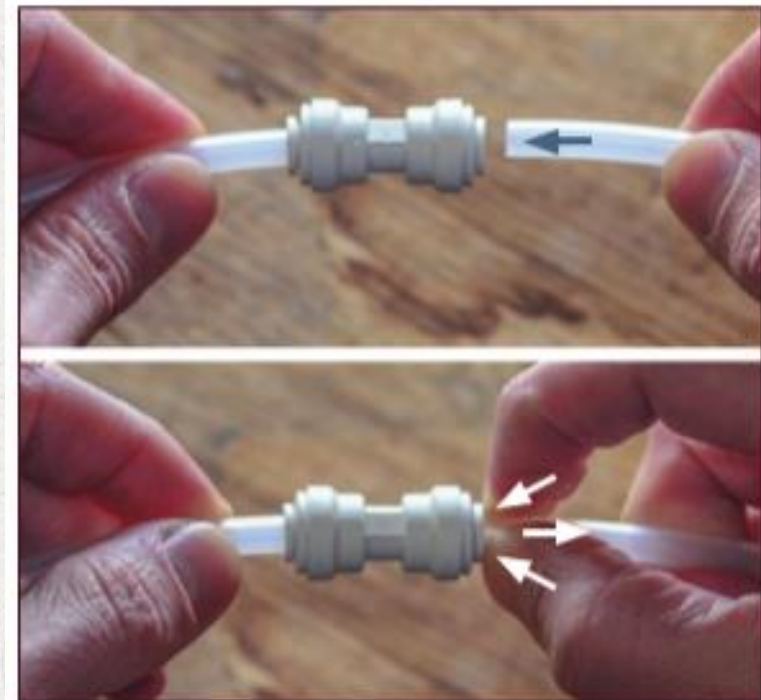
Tubing can simply be inserted into quick-connect fittings to make a connection. For removal, a collet must be depressed as the hose is pulled out of the fitting.
